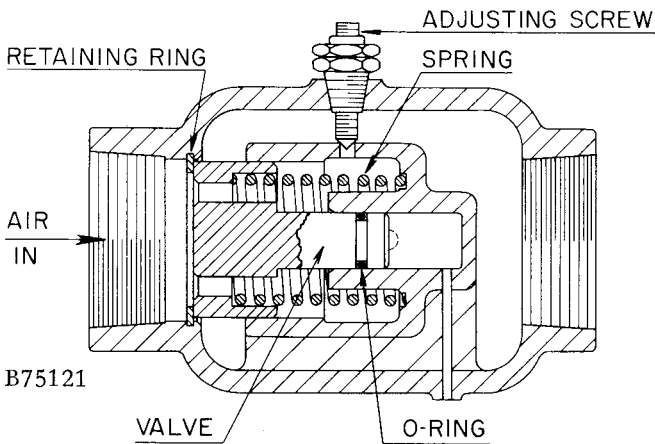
MINIMUM DISCHARGE PRESSURE VALVE
